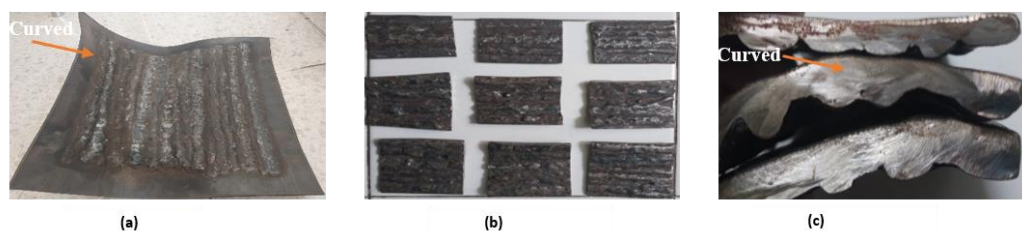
(a) Hardfacing welding results using the Edzona-290 electrode with variations of 1, 2, and 3 layers (b) Results of cutting the specimen (c) side view of the thickness of the hardfacing welding results
